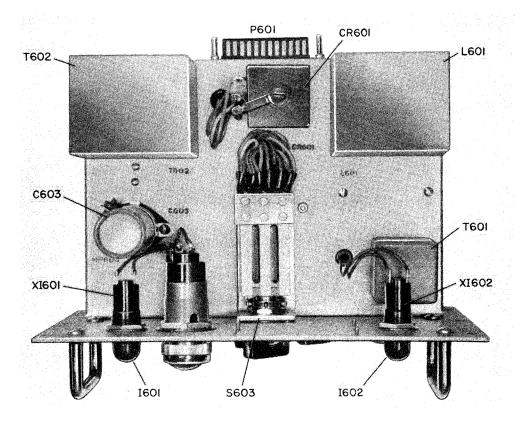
Adapter, Control, Location of Test Points, Bottom of Chassis
